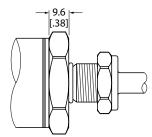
Design with flat face (F10) – Housing nut with thread, dimensions in mm [in]
